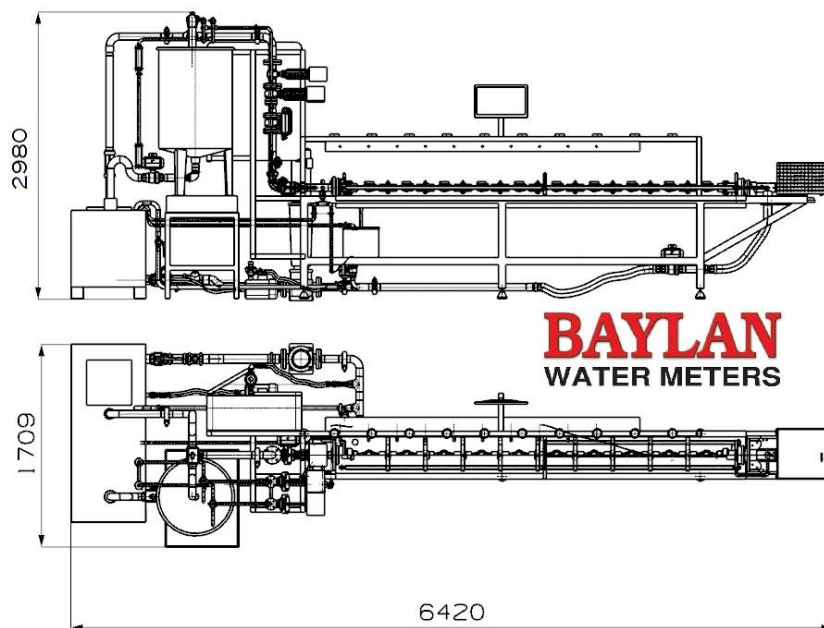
BTB-10 DN15-DN50 Single Line Test Bench Dimensioned Technical Drawing
